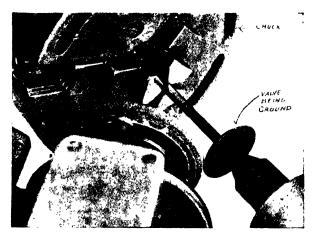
Valve grinding on Lathf Using the same grinding attachment as is shown in Fig. 35
